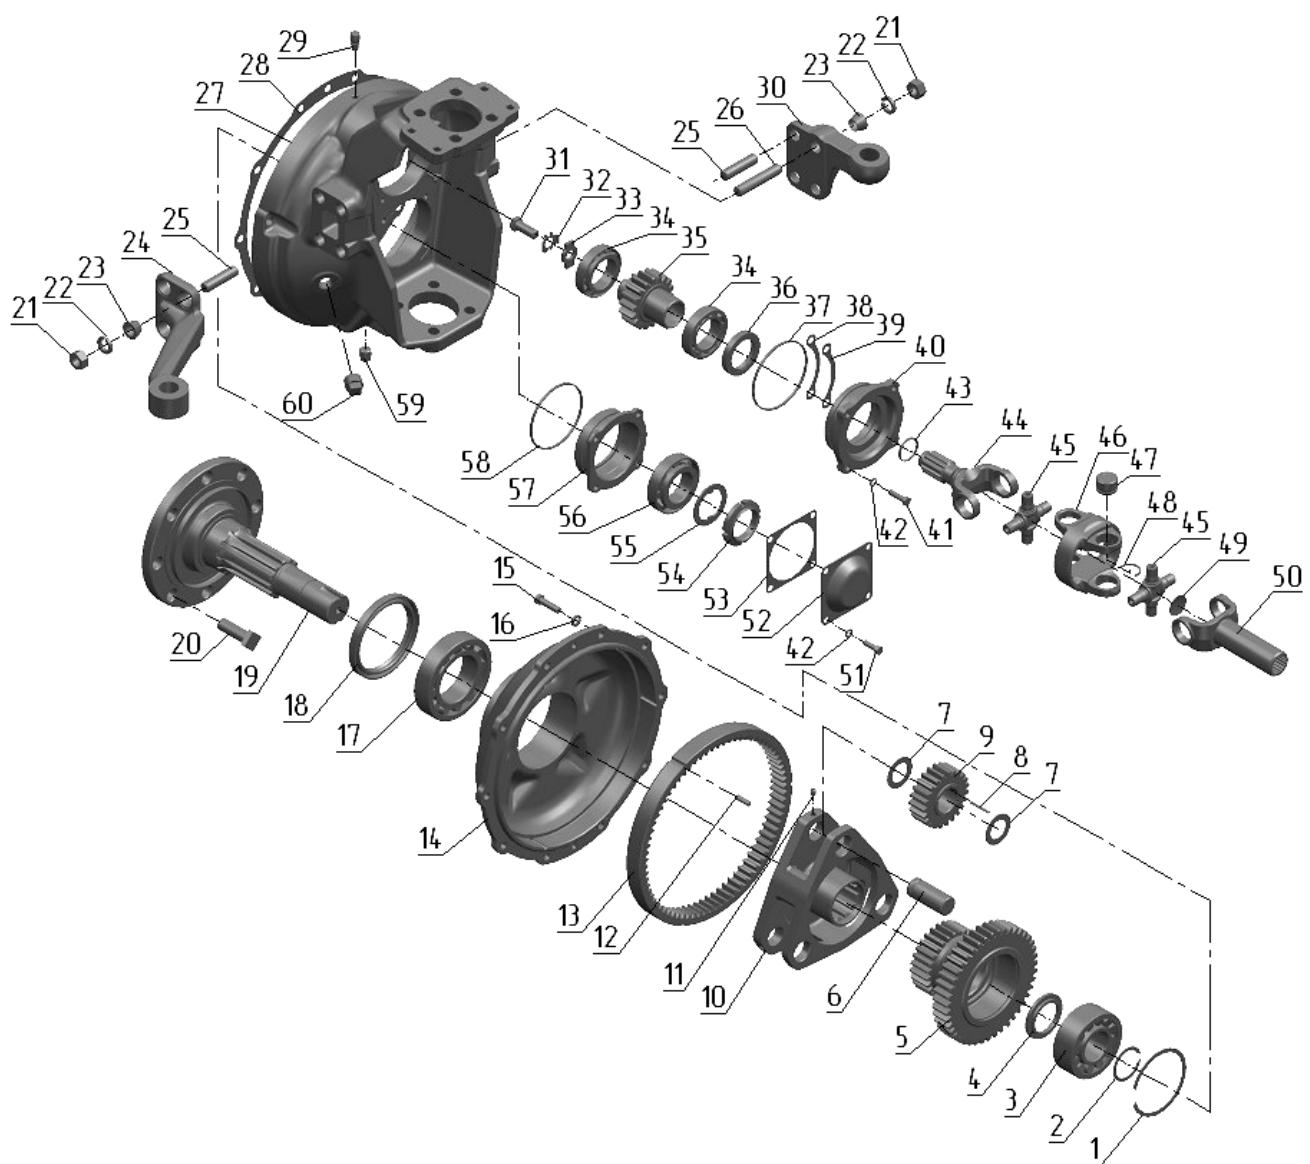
Final drive reduction gear of the front driving axle (for FDA 822-2300020(Fig.23.2))
